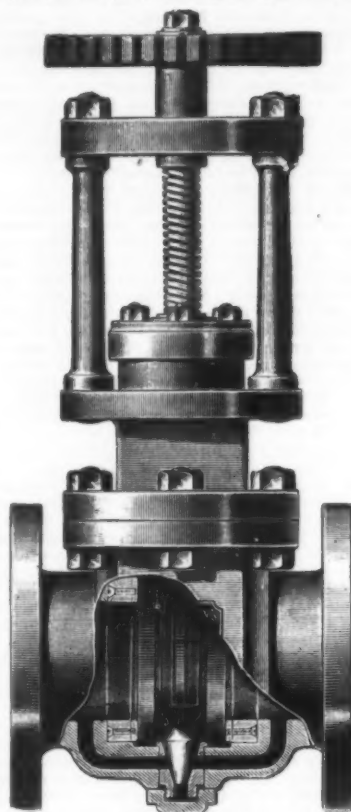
GENERAL VIEW OF VALVE PARTLY IN SECTION.
